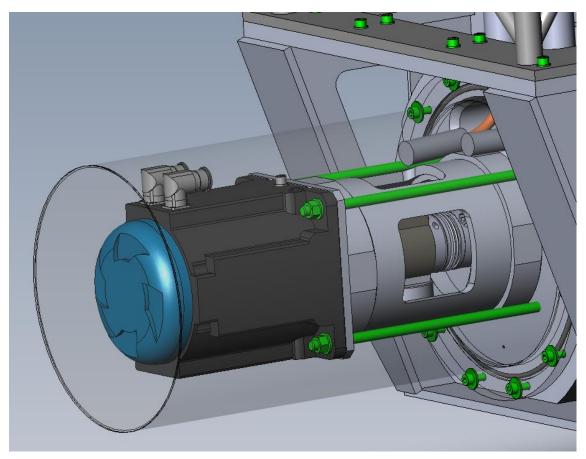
Detail CAD view of the PTO and torque transducer inside a dry sleeve
